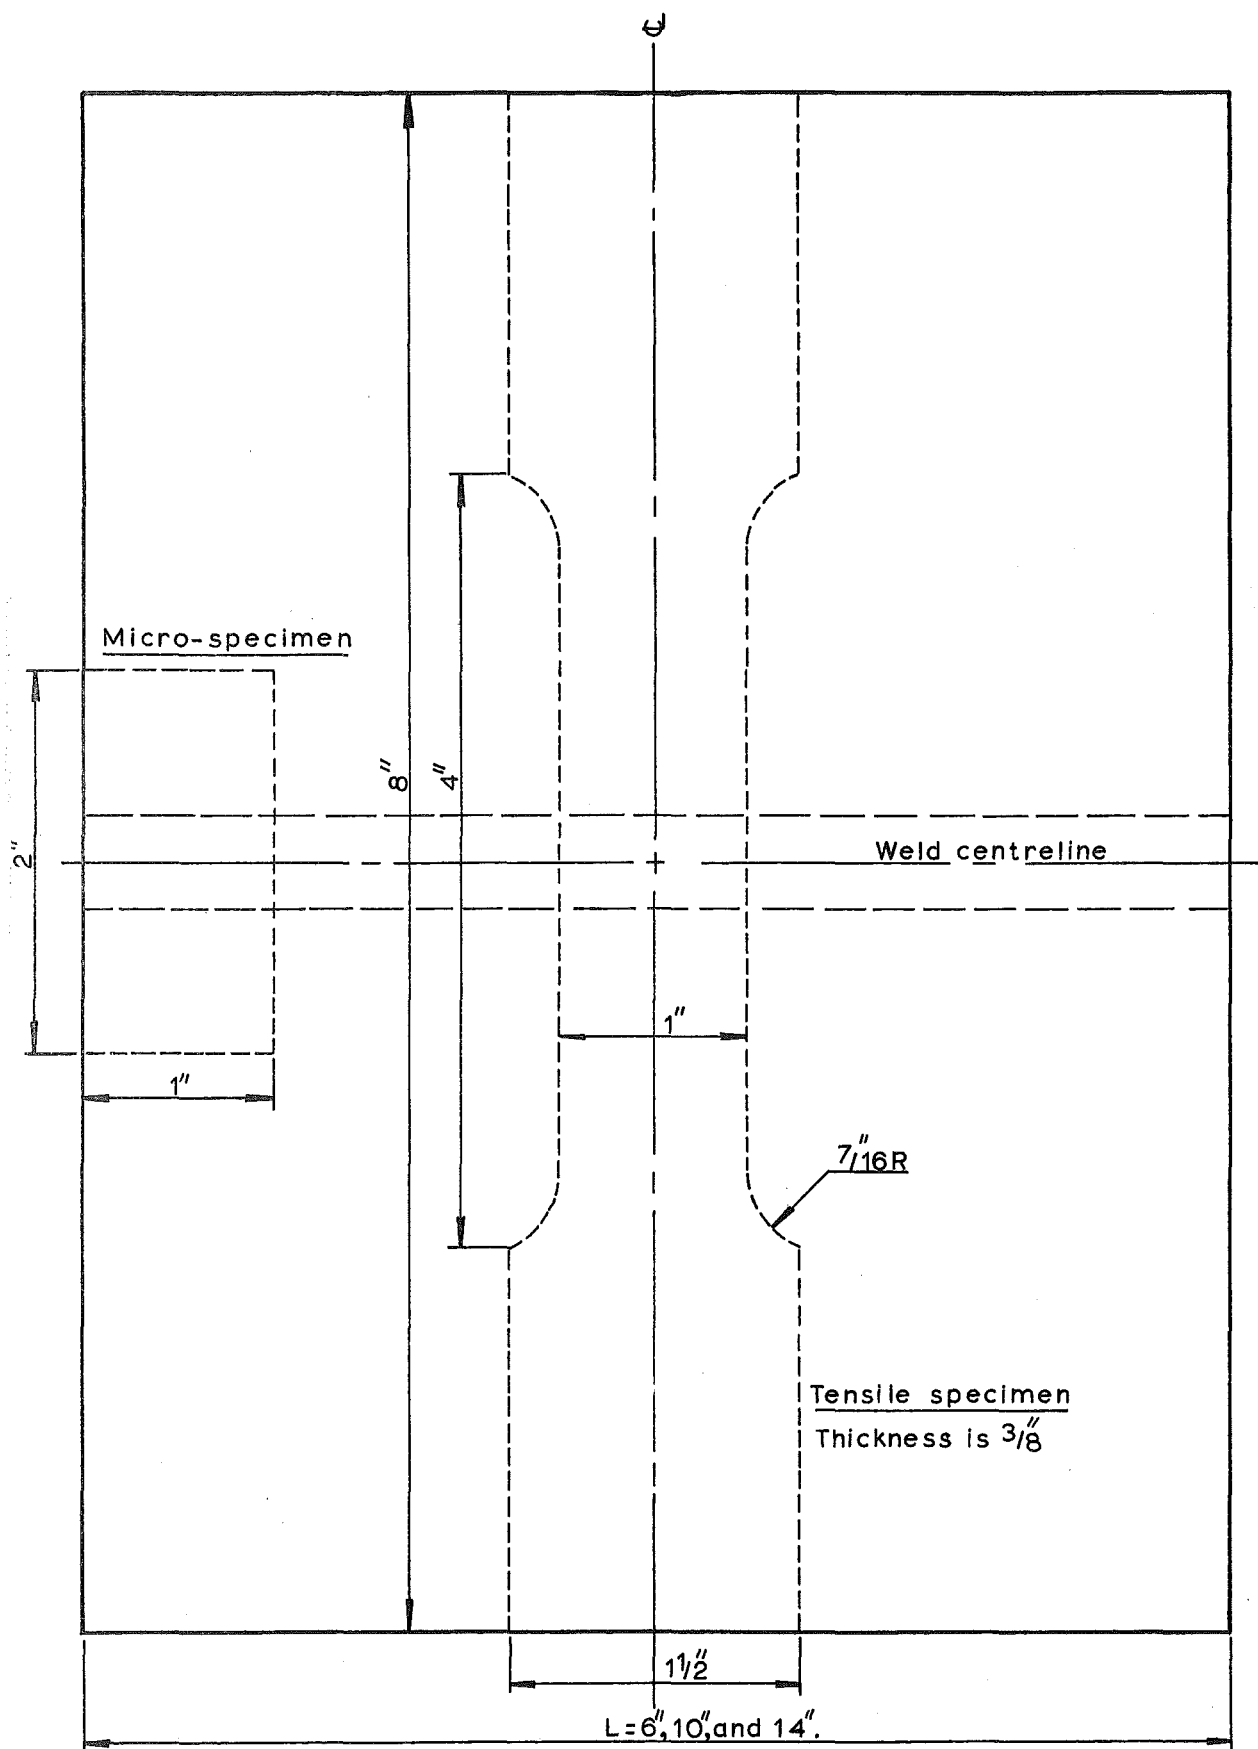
Tensile and micro-specimens from welded plate.
